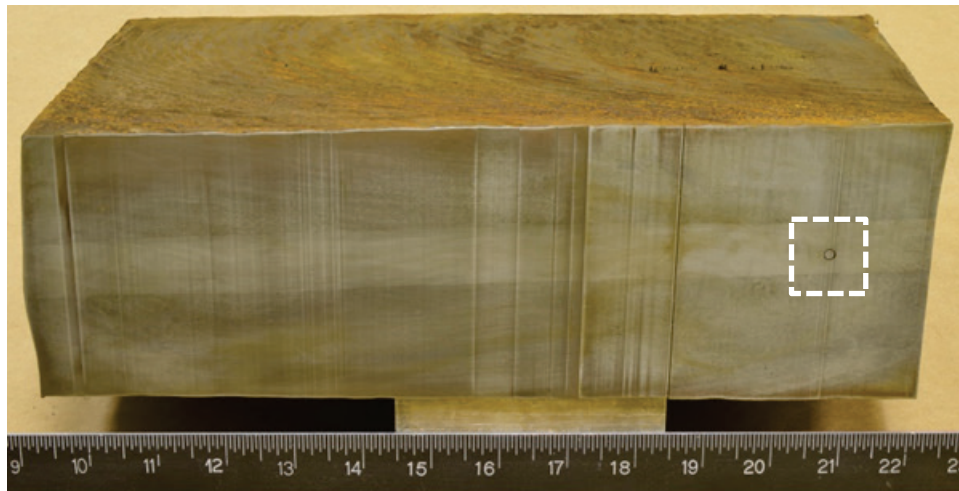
Etched inner diameter with cladding removed. Note the highlighted void in the weld. See Figure 51 for more details [17].
